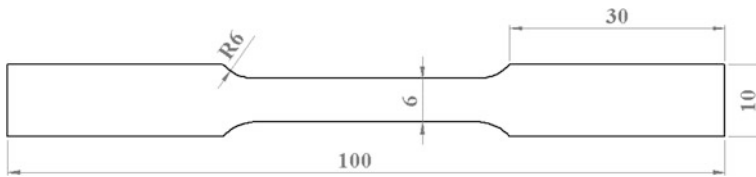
Schematic drawing of tension test specimen (Thickness = 6 mm)
